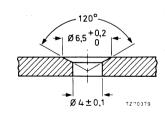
Shape of hole for 500 V insulation, nut fastening.
